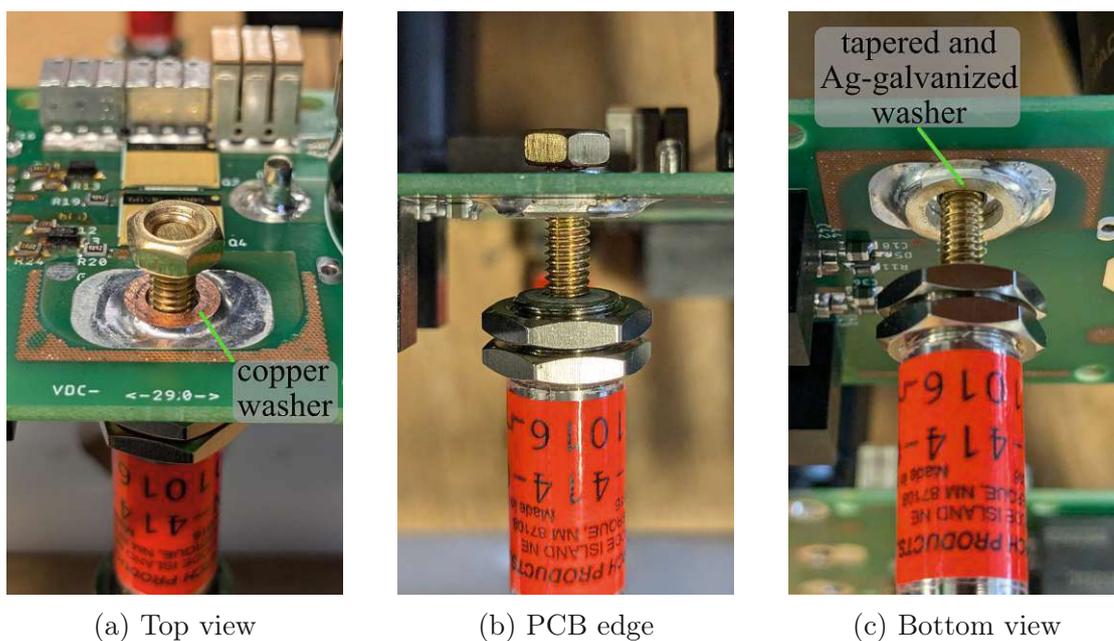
Images of soldered and faced washers on the top and bottom side of the PCB to accommodate the CSR
